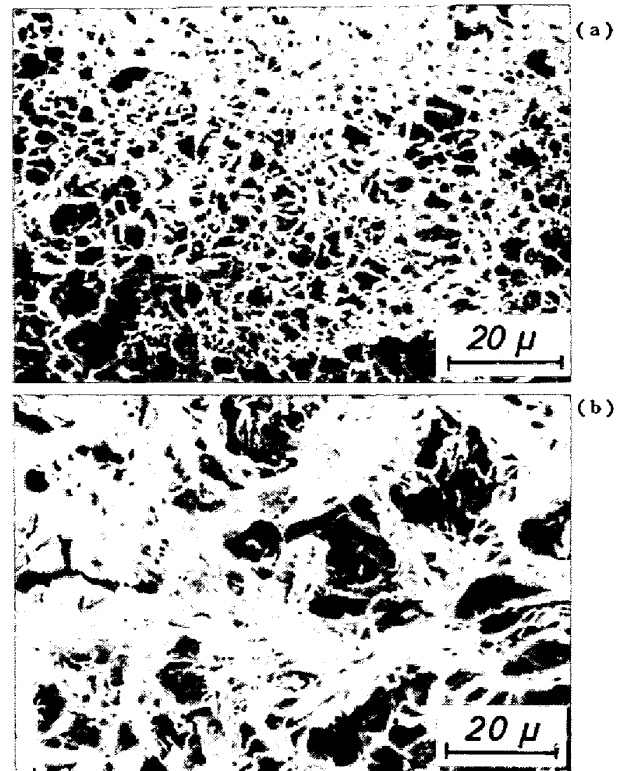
Fractographs of tensile specimens of CM 25 transformed at (a) 450°C and (b) 680°C, showing that bainite reveals small size dimples and divorced pearlite reveals large size dimples.
